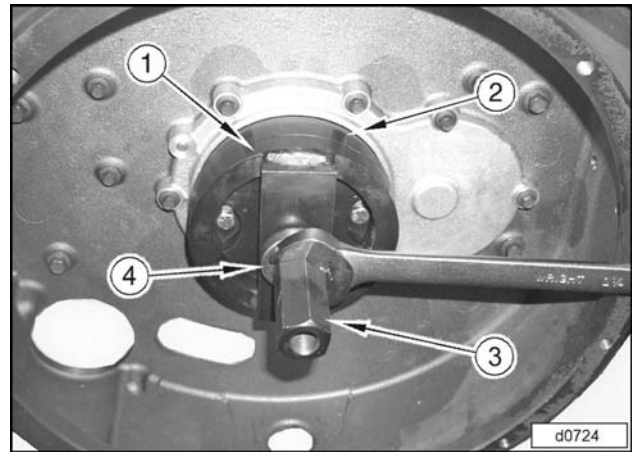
Installing rear main oil seal and wear sleeve combination onto crankshaft
